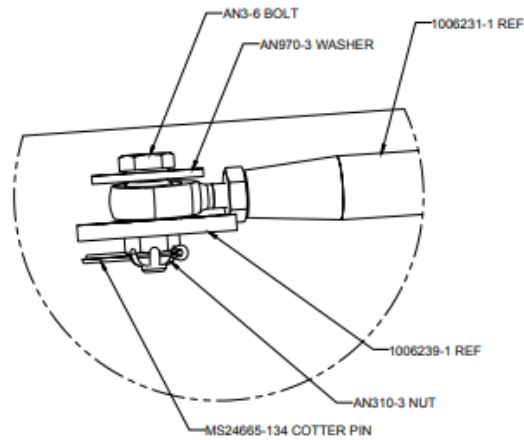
ROLL SERVO ARM INSTALLATION
